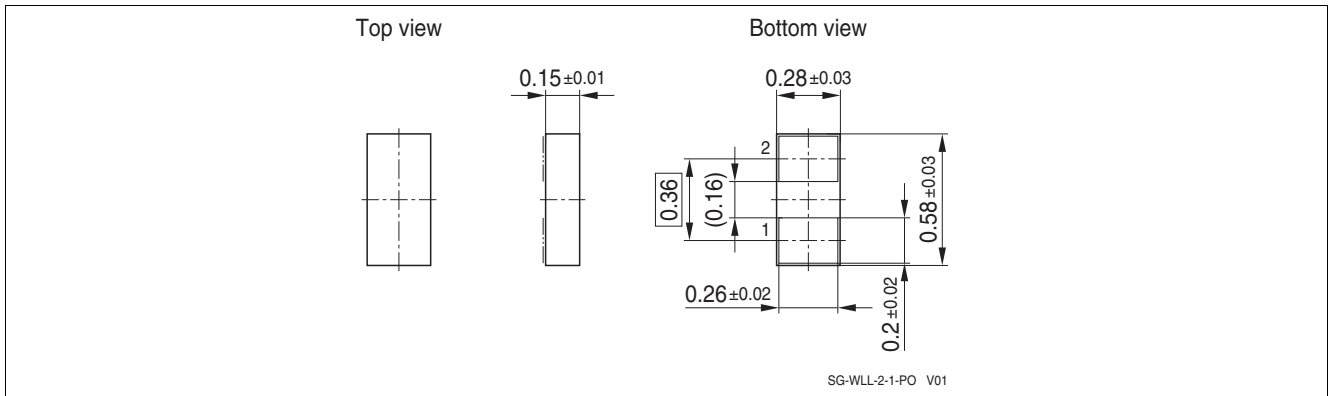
WLL-2-1 Package outline (dimension in mm)
